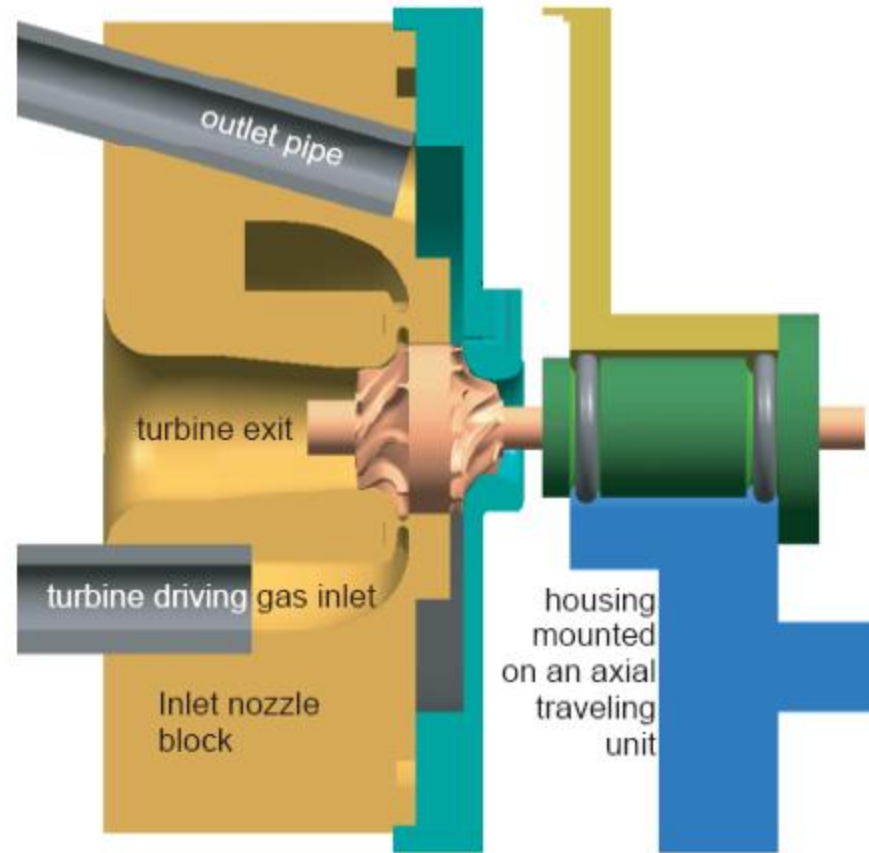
Cross section of inlet nozzle block, rotor group, bearings and mounting unit
